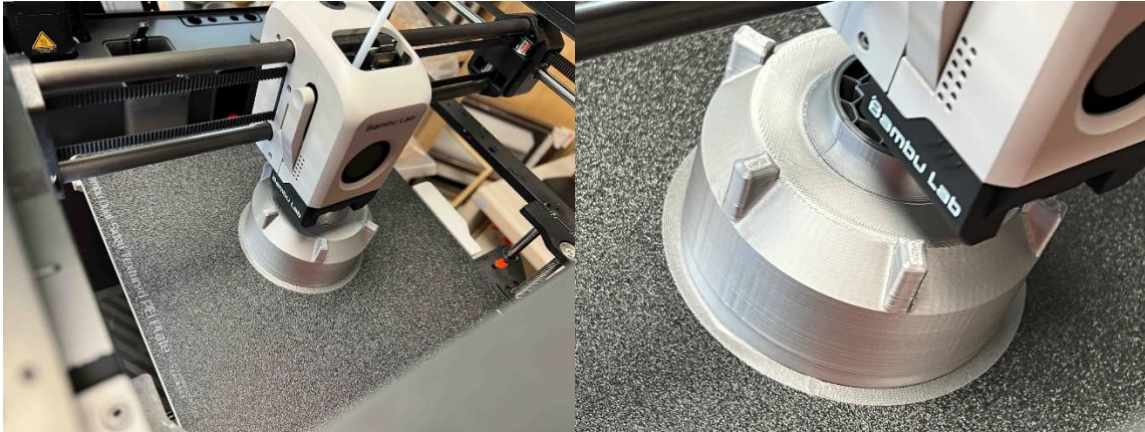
Oil filter wrench 3D printing process. Pictures by Author
